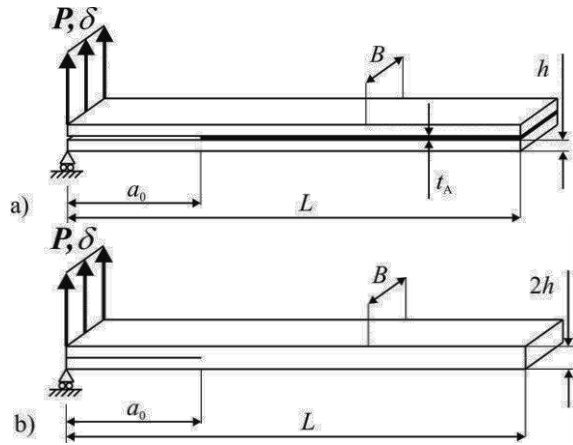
Geometry of the DCB bonded (a) and co-cured (b) specimens.
